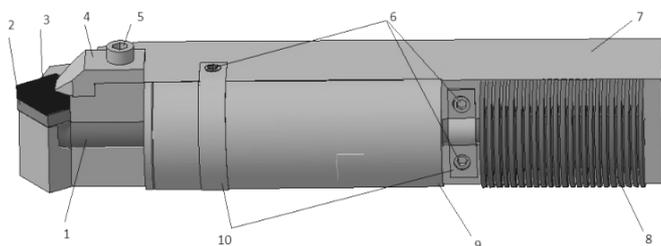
cutter design with a container (Rose metal inside) and HP (1-HP;2-support plate;3-cutting insert; 4-clamp;5...6-screws;7-holder;8-HP radiator;9-container with fusible substance;10-retaining clips)
